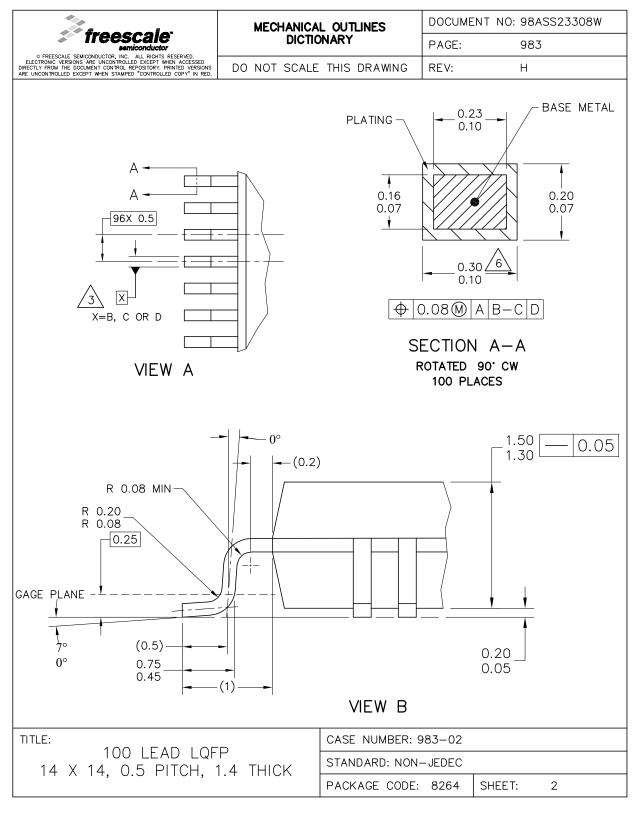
100 LQFP package mechanical drawing (2 of 3)
